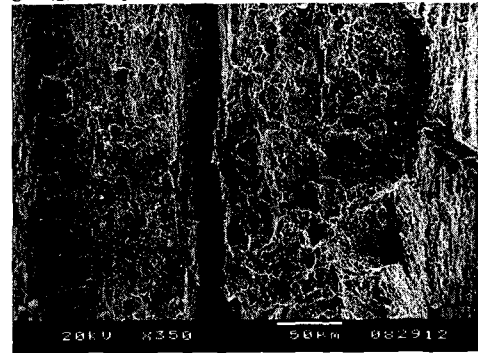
(h) Dimples and Cleavage Fracture of H-100 ppm at RT
